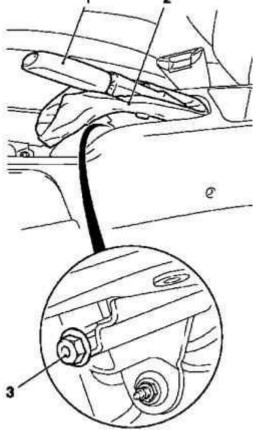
Adjusting the parking brake system: 1 - lever of the parking brake system, 2 - center console, 3 - adjusting nut
